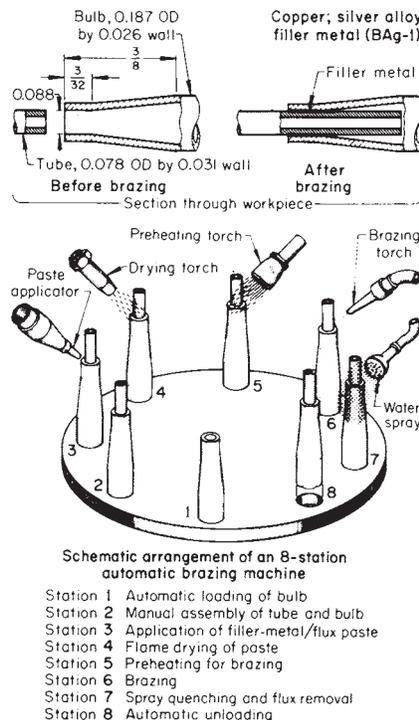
Bulb and tube assembly. Brazed by mechanically held torches on an eight-station turntable. Dimensions in inches
